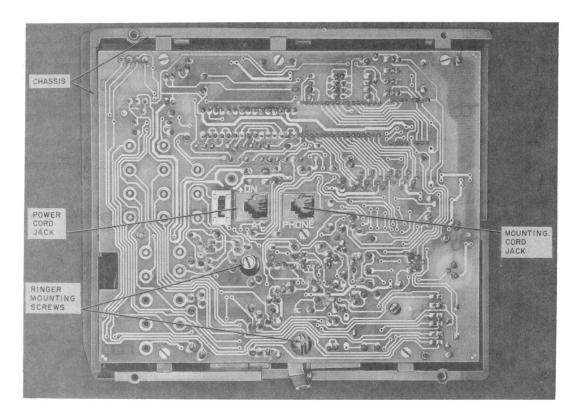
Bottom View of Power Supply Board (Lower Housing Removed)
